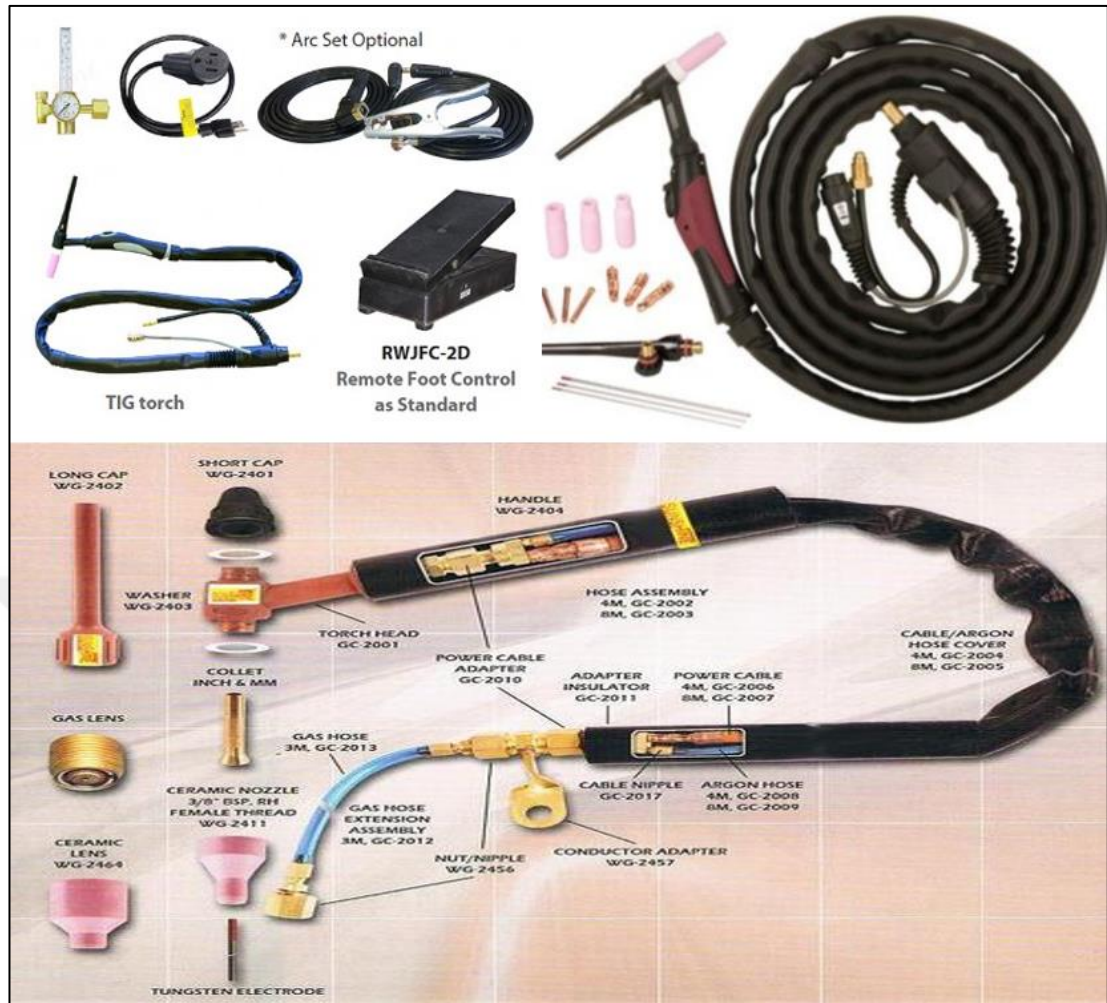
Some of the most popular cables are used in welding TIG.
